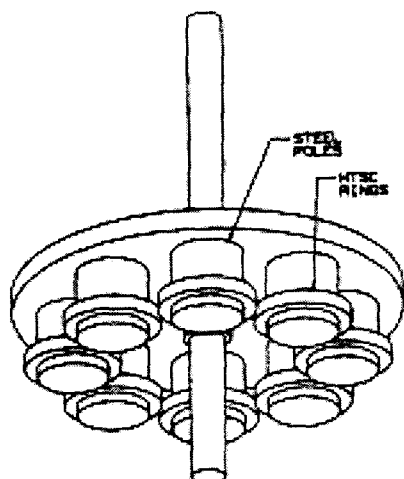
Rotor of brushless DC trapped flux motor [13].
